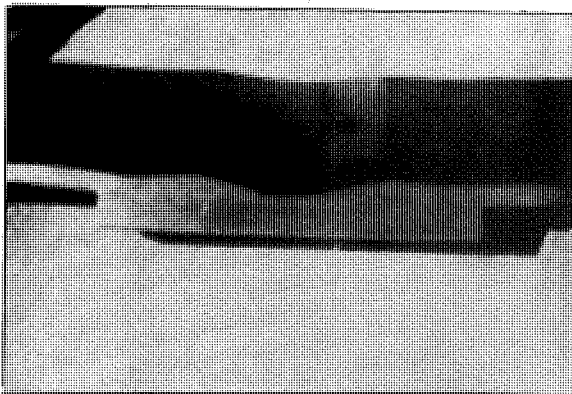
Section of a duplex stainless steel pipe joint, explosively welded in a single shot.
